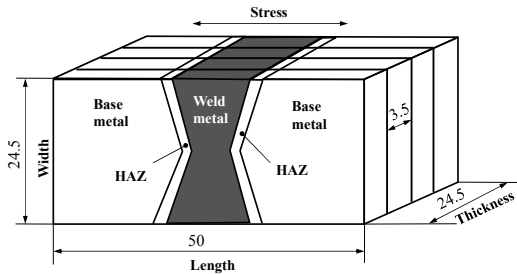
Shape of welded joint specimen of ASME Gr. 91 steel.
